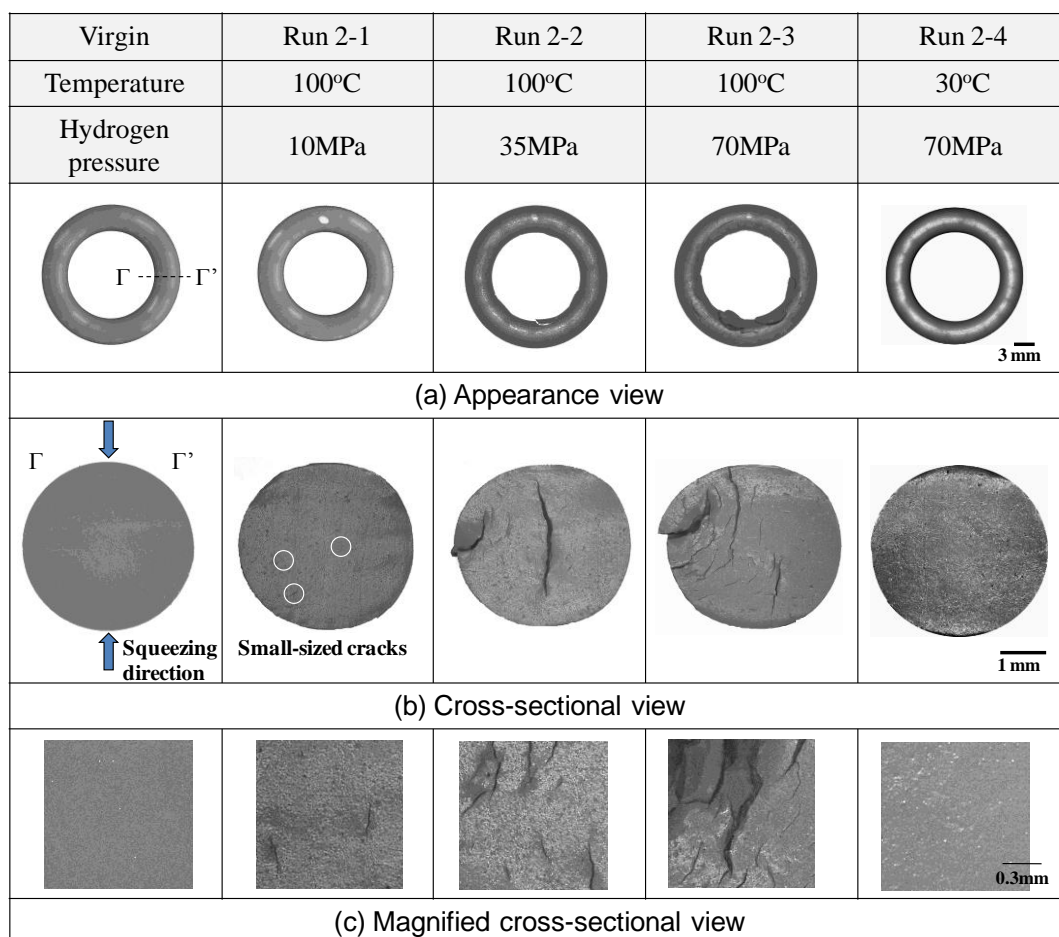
Crack views of O-ring sample after high-pressure durability tests
